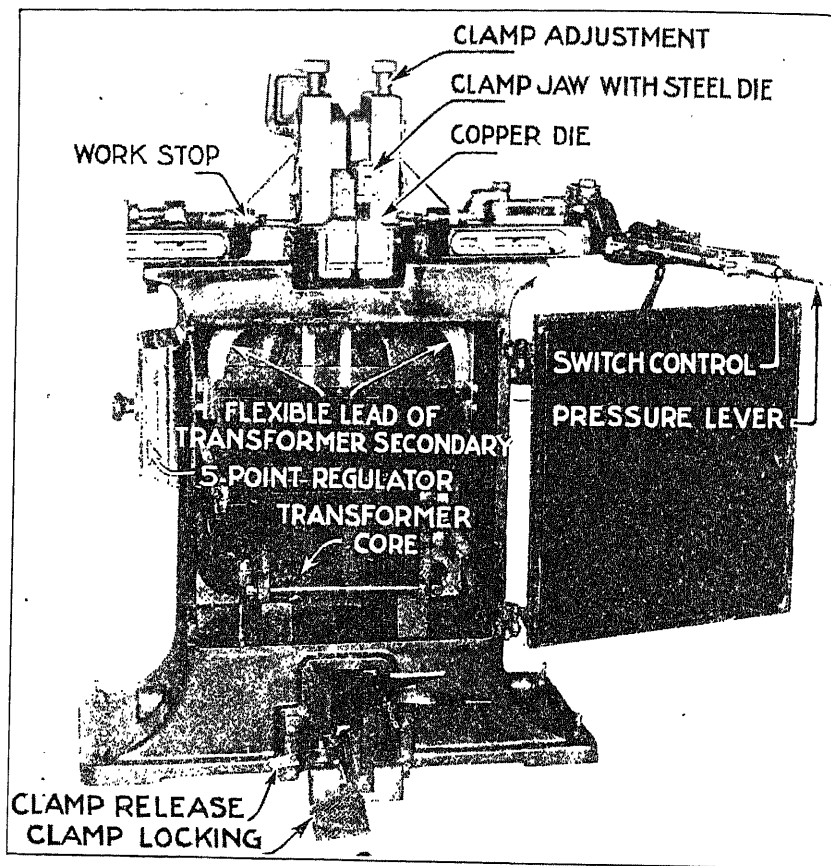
Principal Parts of a Butt-Welding Machine.
